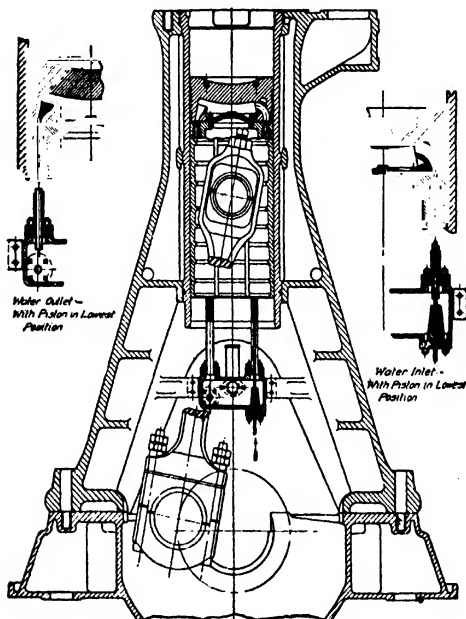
Fulton-Tosi Diesel Engine, Showing Cooling-Water Arrangement as Applied to Piston of Large Engines
